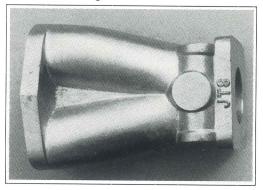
The manifold as cast showing the boss (top) for a vacuum tapping and the 2 bosses on the sides for balance pipes.
